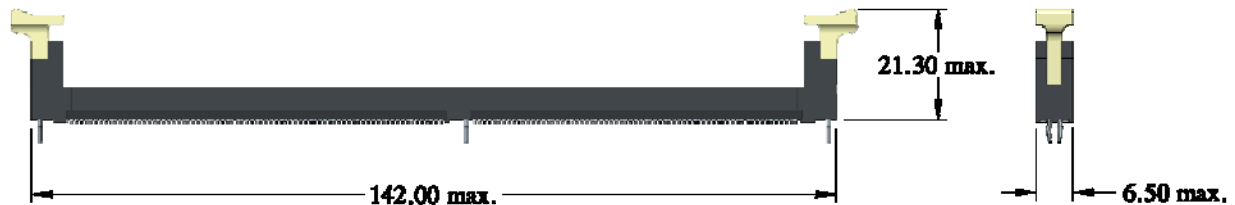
Surface Mount (SMT) Connector Socket Outline
